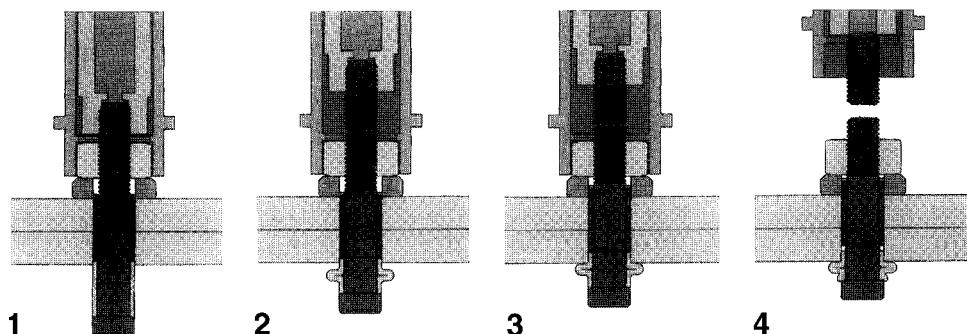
Exploded view of Huck Ultra-Twist fastener
